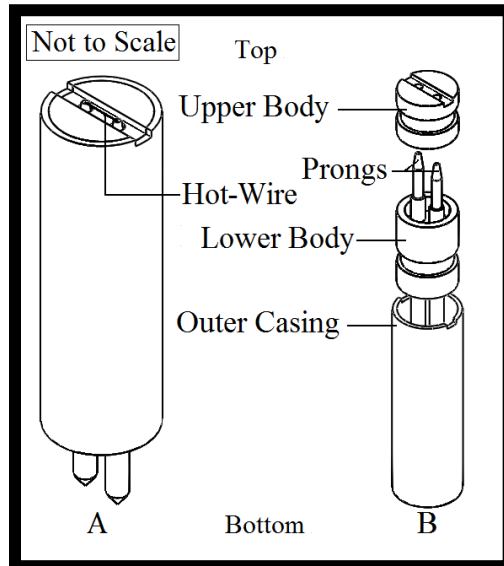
Sensor parts: A) assembly; B) exploded view
